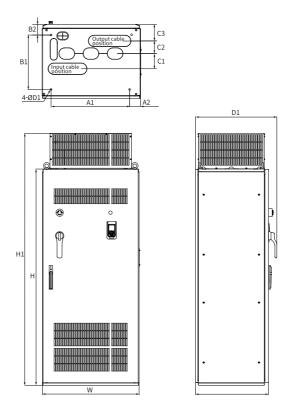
Outline dimensions and mounting dimensions of T13 models (without auxiliary
